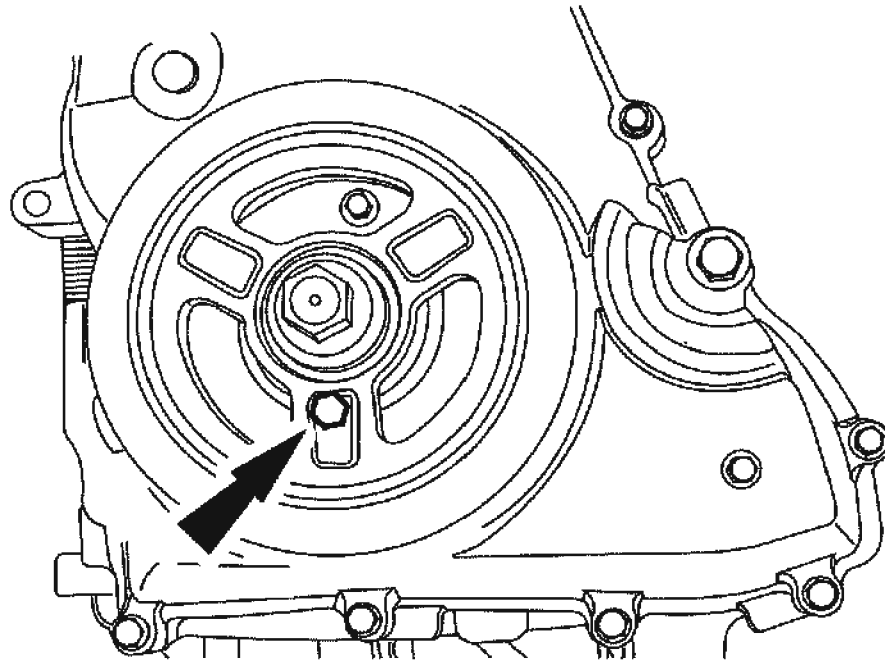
Adjusting CKP Sensor With Alignment Jig And Tightening Bolts
